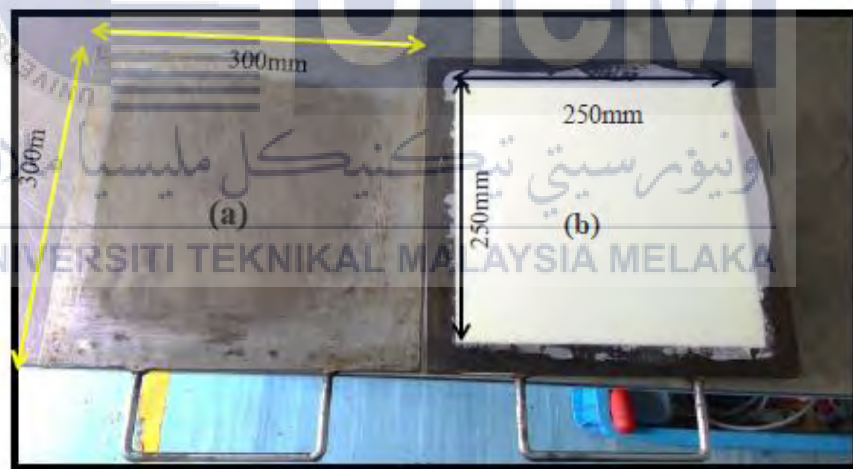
The Dimension of (a) Mold Casing (b) ABS Sheet Produced
